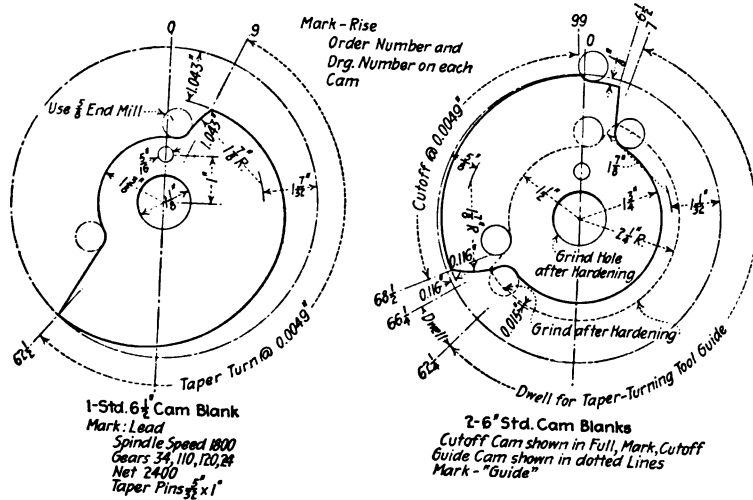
CAMS TO OPERATE SCREW-MACHINE STOP
